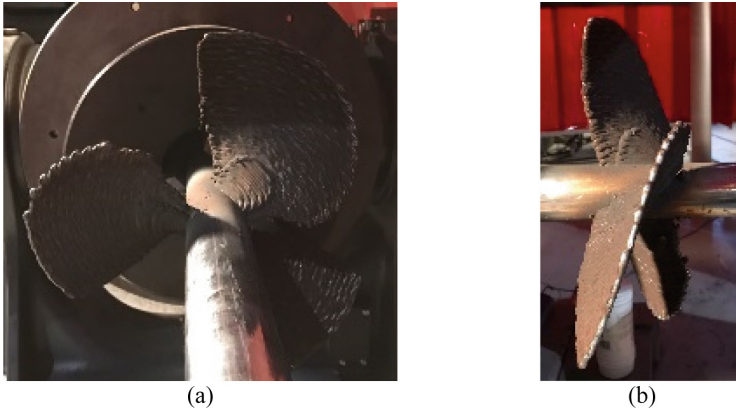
As-deposited shape of Design #4, (a) initial deposition; (b) after deposition.
